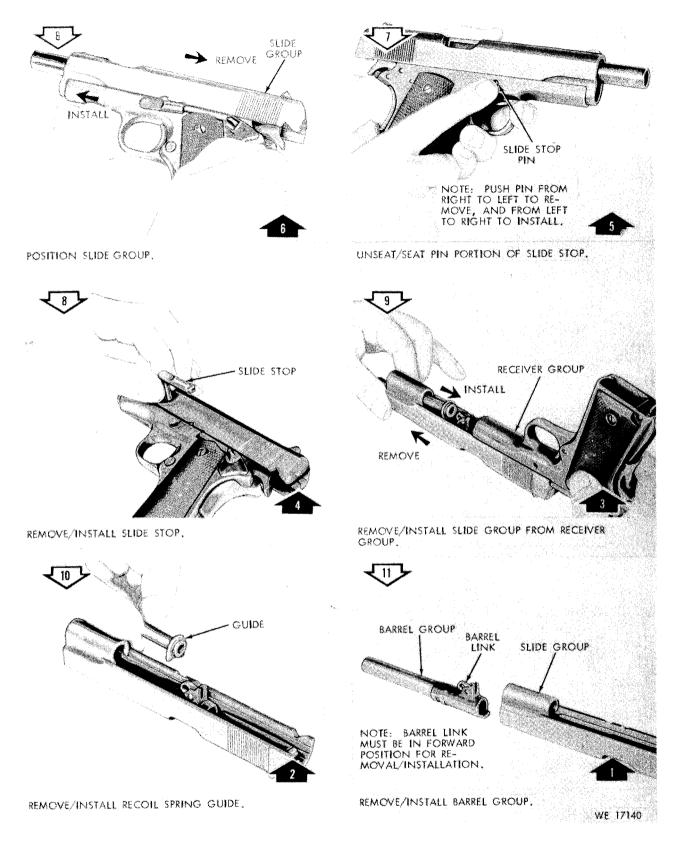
Operator's disassembly/assembly of Caliber .45 Automatic Pistol, M1911A1. (3 of 3)
